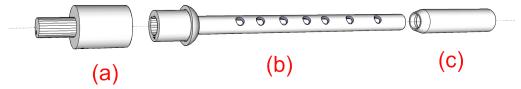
3D model of chanter exterior components: (a) top section to house pressure sensor, (b) middle section incorporating finger holes, and (c) bottom section containing microcontroller circuitry.
